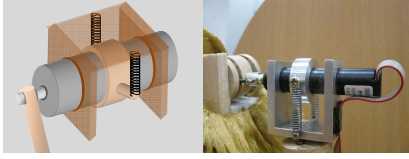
Design drawing and picture of 1-DOF flexible joint.
